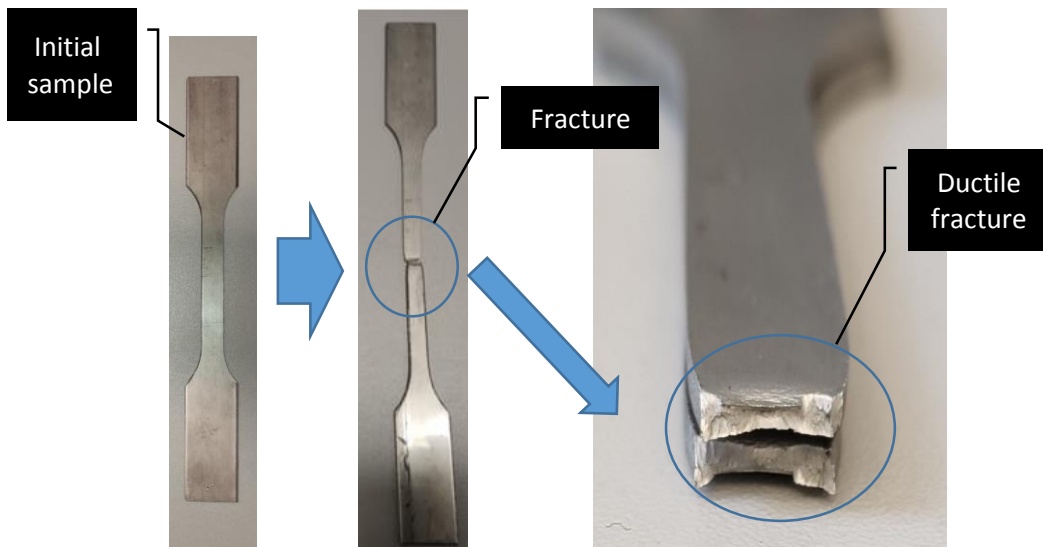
AISI 304 tensile sample: fracture locations, marked ductile fracture, specimen dimensions in fig. 5
